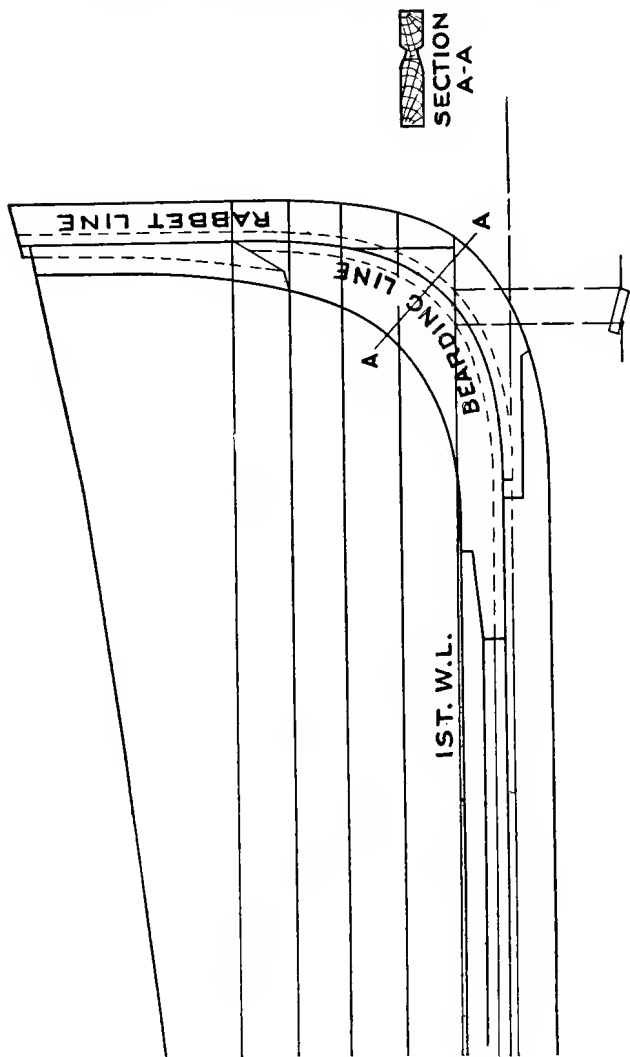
Section Through Stem Showing the Development of Rabbet.
